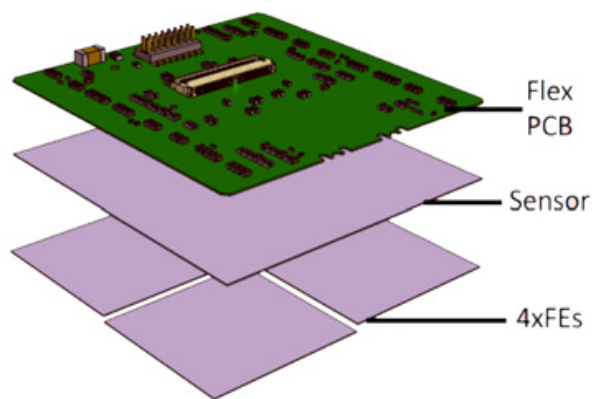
Exploded schematic of an ITk pixel quad module [239]. Using the flip-chip process, four ITkPix FE chips are bump-bonded to a single sensor. A flexible PCB is then glued on top and wire-bonded to the FE chips.
